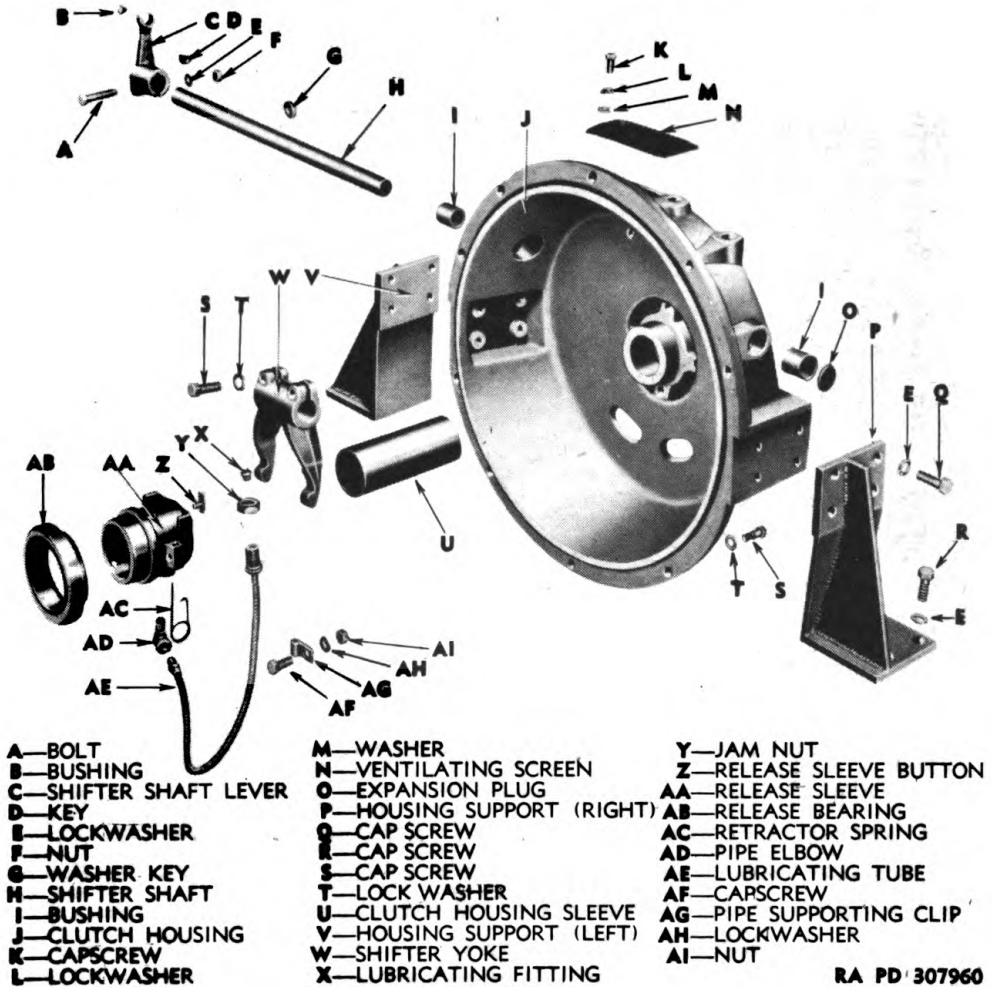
Clutch Housing and Release Bearing and Sleeve Disassembled
